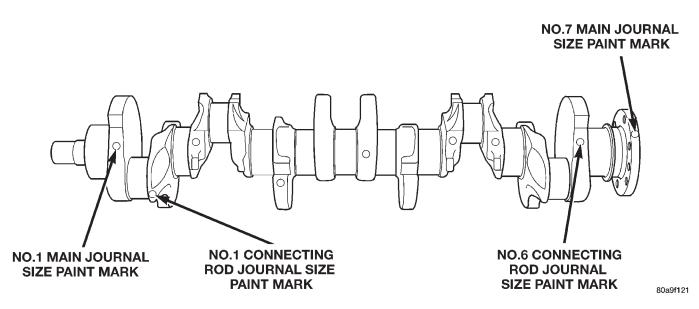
Crankshaft Journal Size Paint I.D. Location
